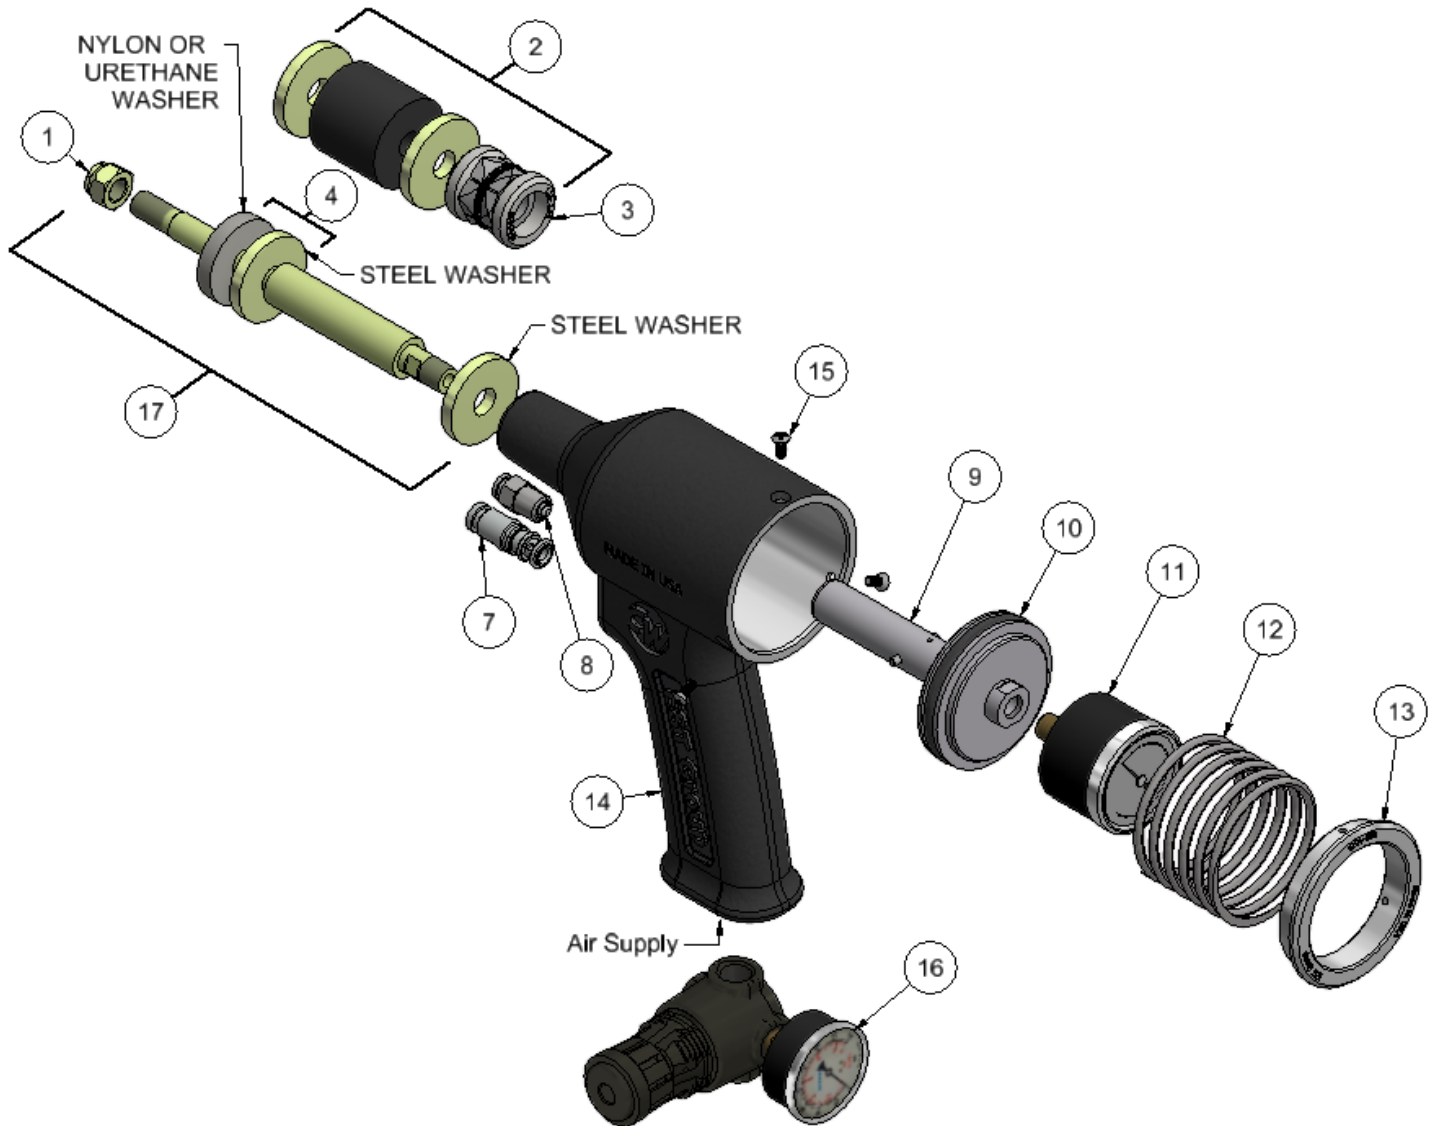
G-160 Injection Tool (Shown with Optional Support Rod Extension)
